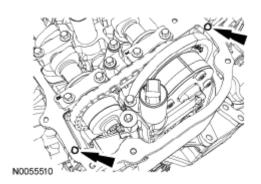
Applying RTV Silicone To Engine Front Cover-To-RH Cylinder Head Joints Courtesy of FORD MOTOR CO.
